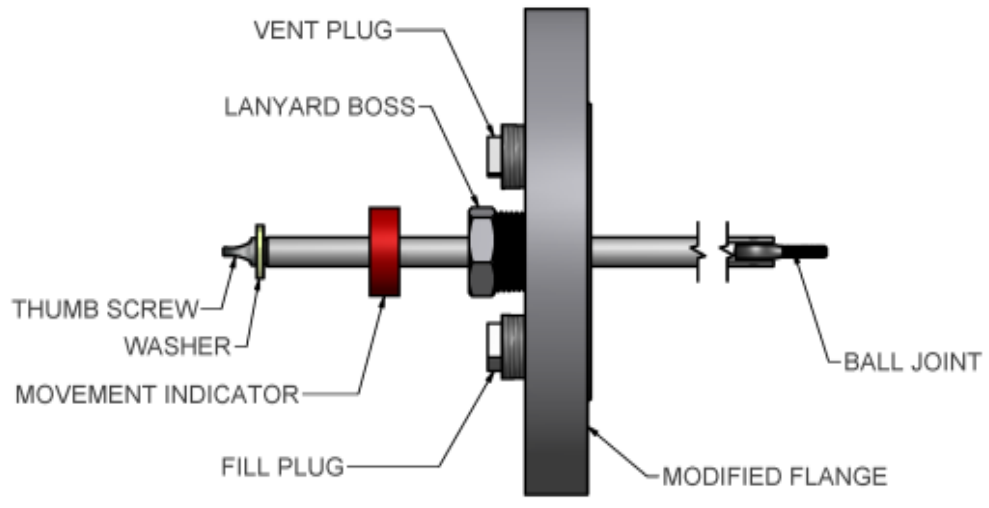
Modified Blind Flange with Optional Lanyard Assembly
